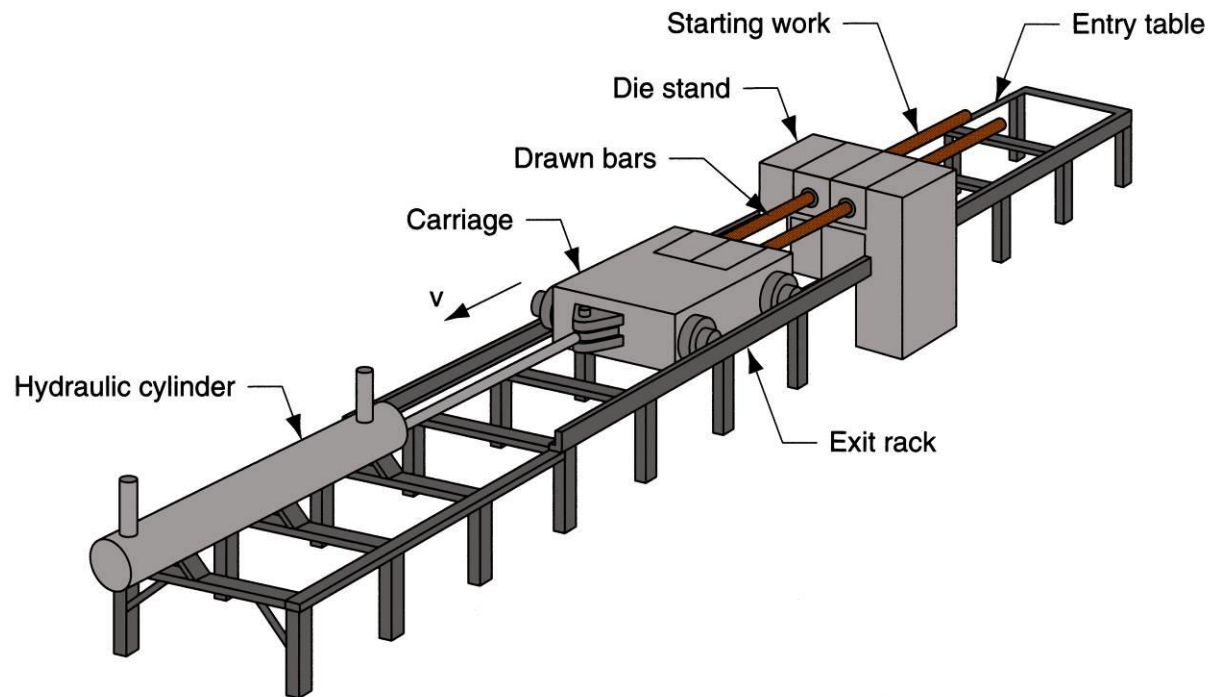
Hydraulically operated draw bench for drawing metal bars.
